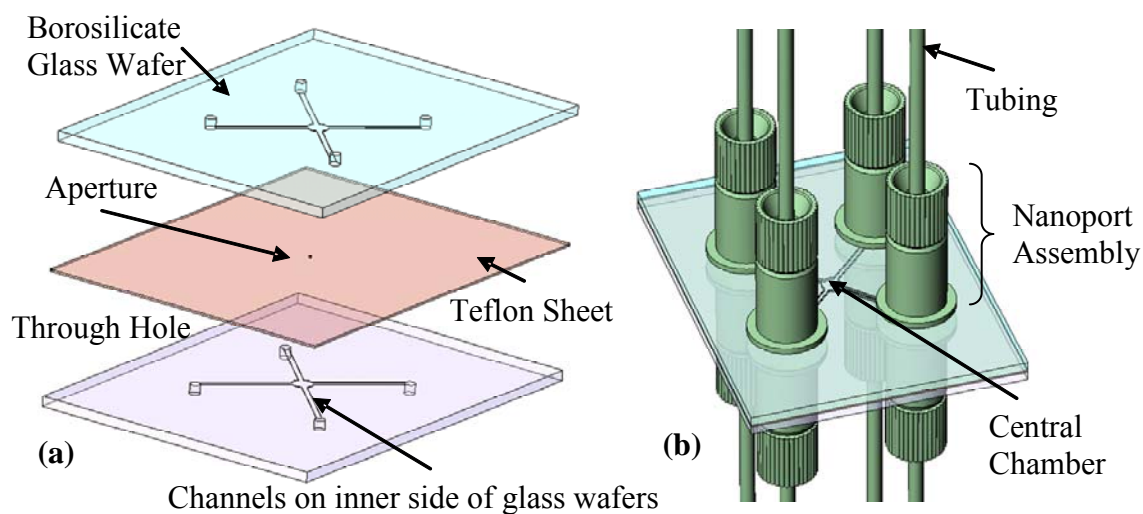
Three-layer design of the device. a Unassembled layers. b After sandwiching Teflon sheet in between glass wafers. Closed channels are formed at each Teflon-glass interface
